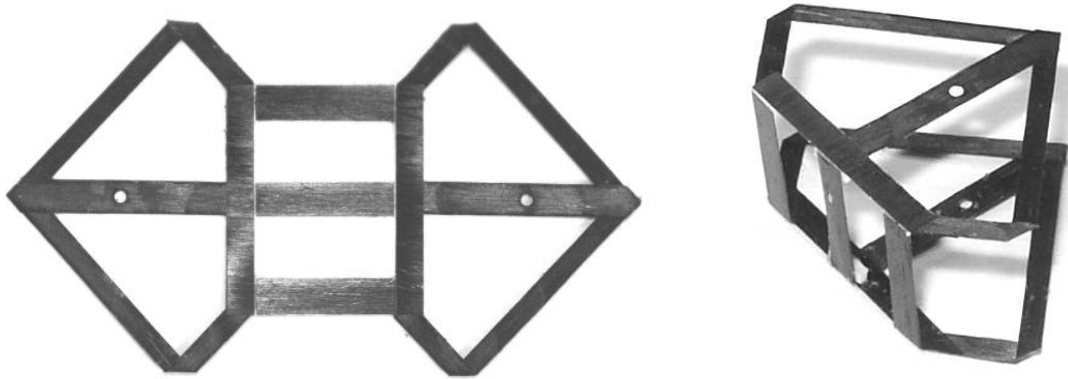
Completed airframe previous to folding into shape (a) and folded (b).
